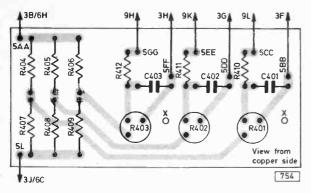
The small board used by E. Erven to mount the RGB drive controls: drill $\frac{1}{8}$ in. holes in the positions marked X to secure the board to two of the RGB output transistor heatsinks—ensure that the board is insulated from the heatsinks. Shown half scale (viewed from the copper strip side).
